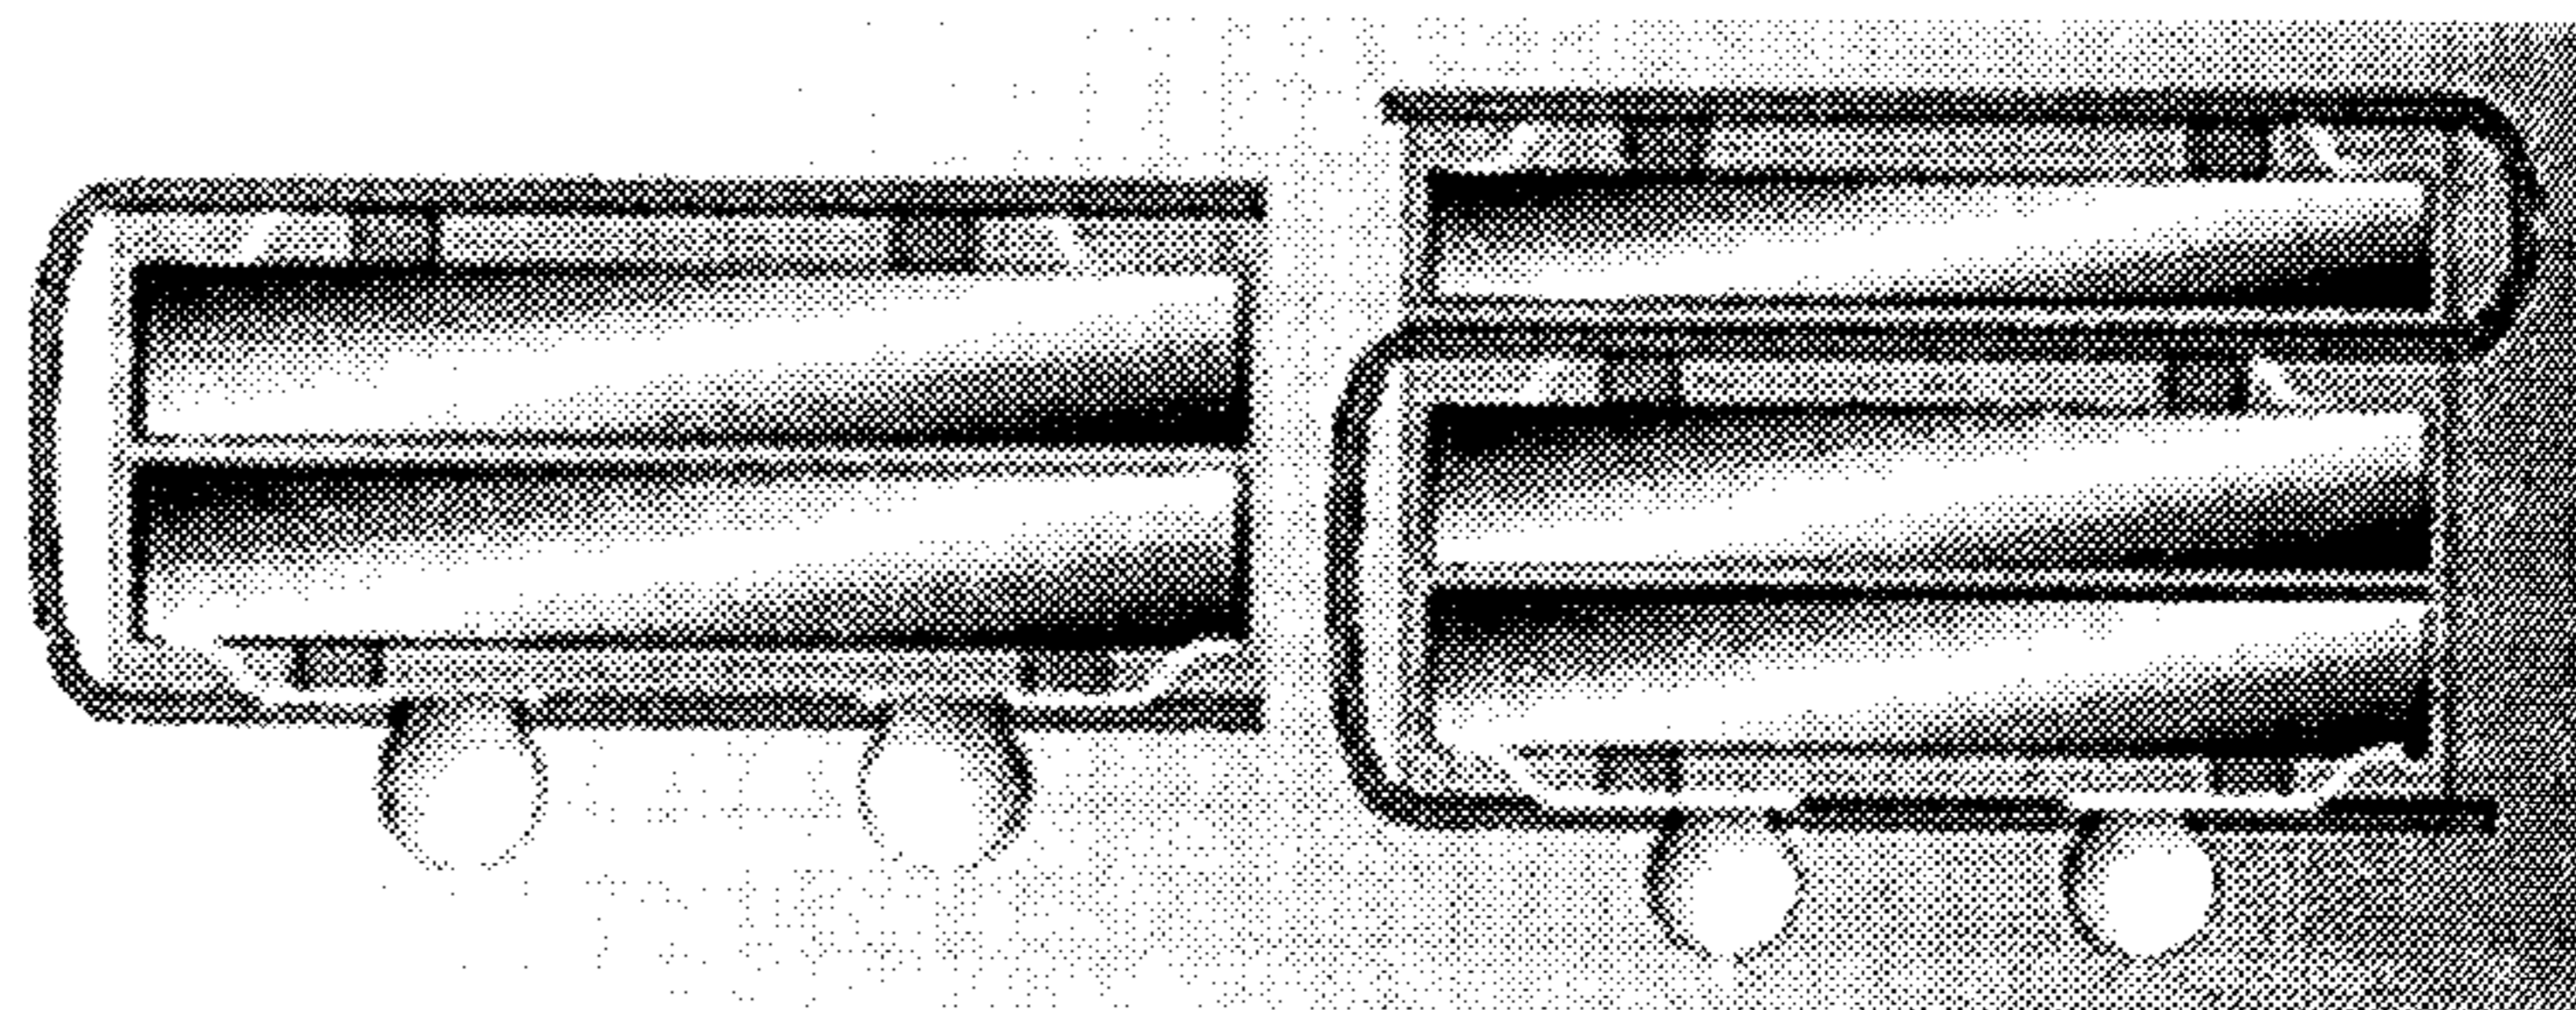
Flexible circuits used as interposers for connecting chip I/O to package I/O.
